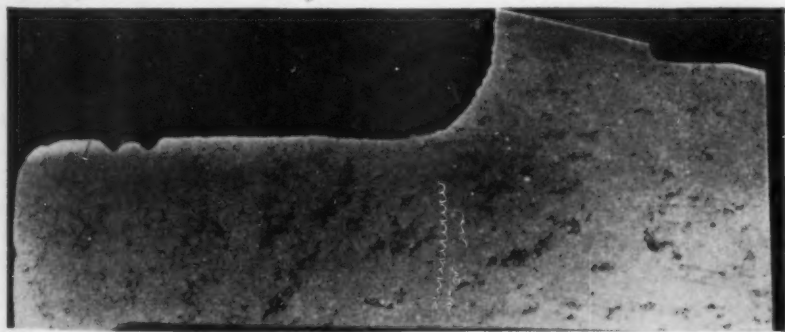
SHRINK POROSITY IN A 90 PER CENT ALUMINUM-10 PER CENT MAGNESIUM CASTING. MAGNIFICATION, 4X.
